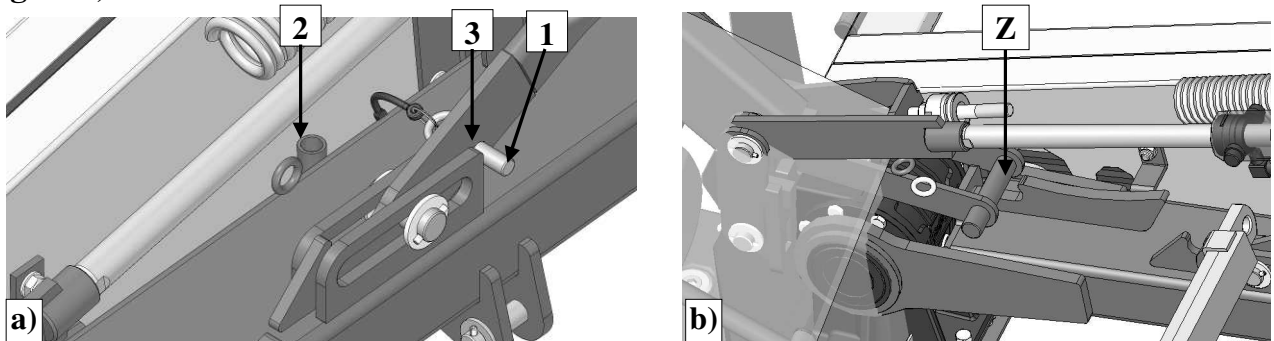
a) 1 – safety pin, 2 – bushing, 3 – hole in cutter bar, b) Z – locking pawl
